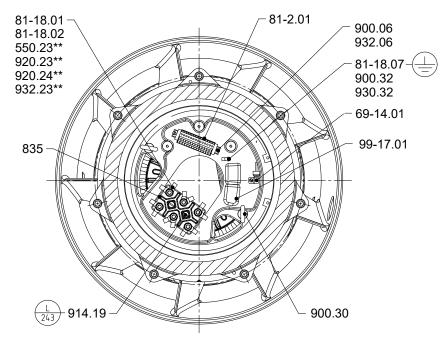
Sensors/terminals, bearing bracket, motors: 70 4 215 4, 47 6 205 6 and 40 8 160 8, pump set with standard sensors  Only fitted on specific sizes.
